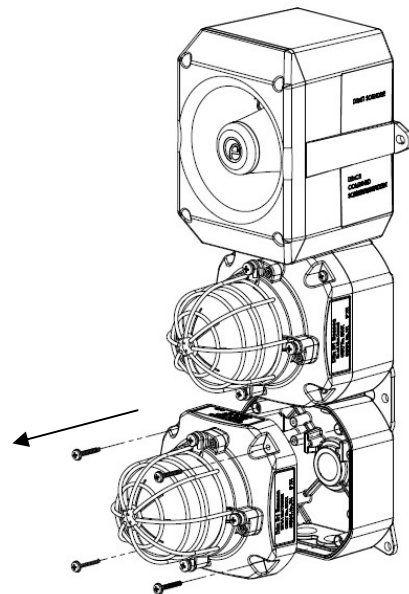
Accessing the Enclosure, PCBA & Terminals
